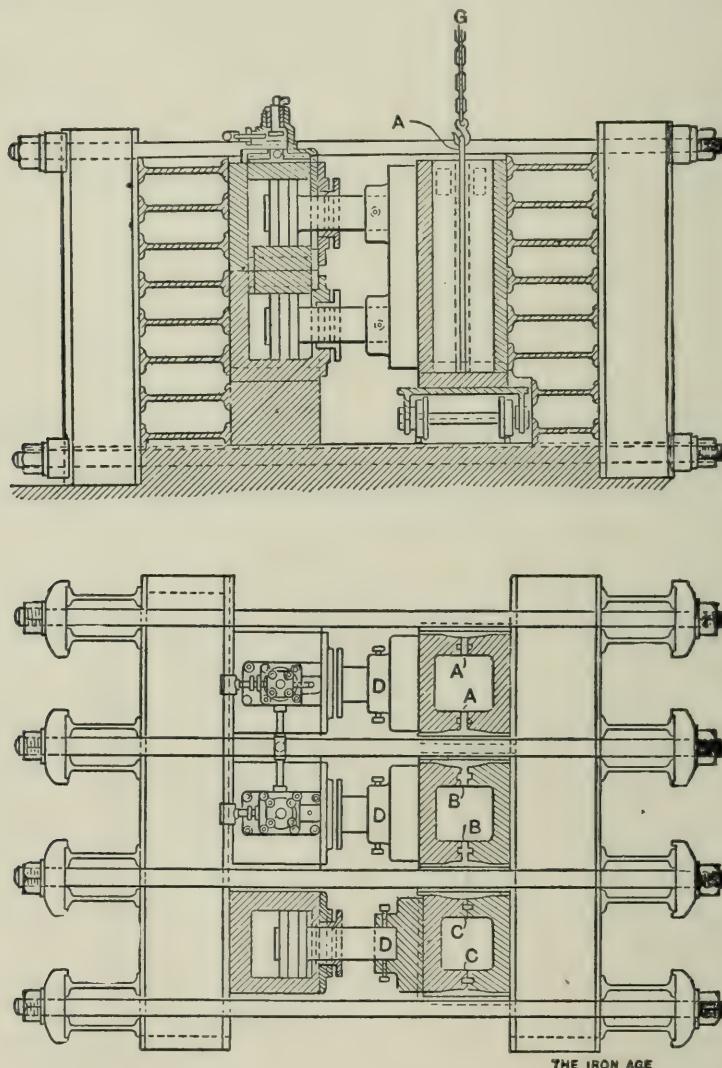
Longitudinal Section and Plan of the Illingworth Casting Machine for Large Ingots in Molds and Wheels
